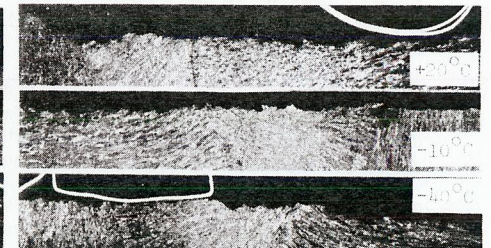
Fracture surface in Weld Metal II. 4x
